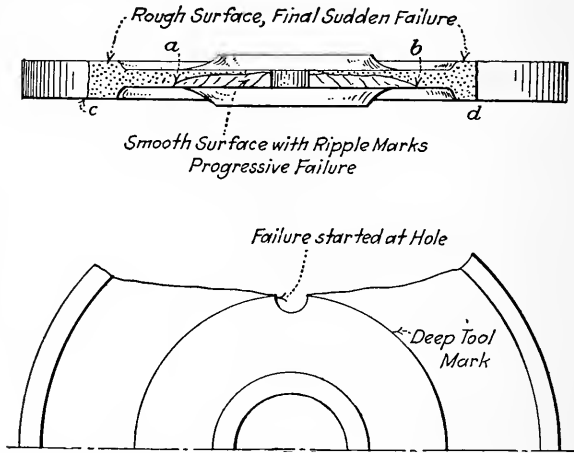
Diagram of typical fatigue failure caused by axial vibration in a thin disc.
